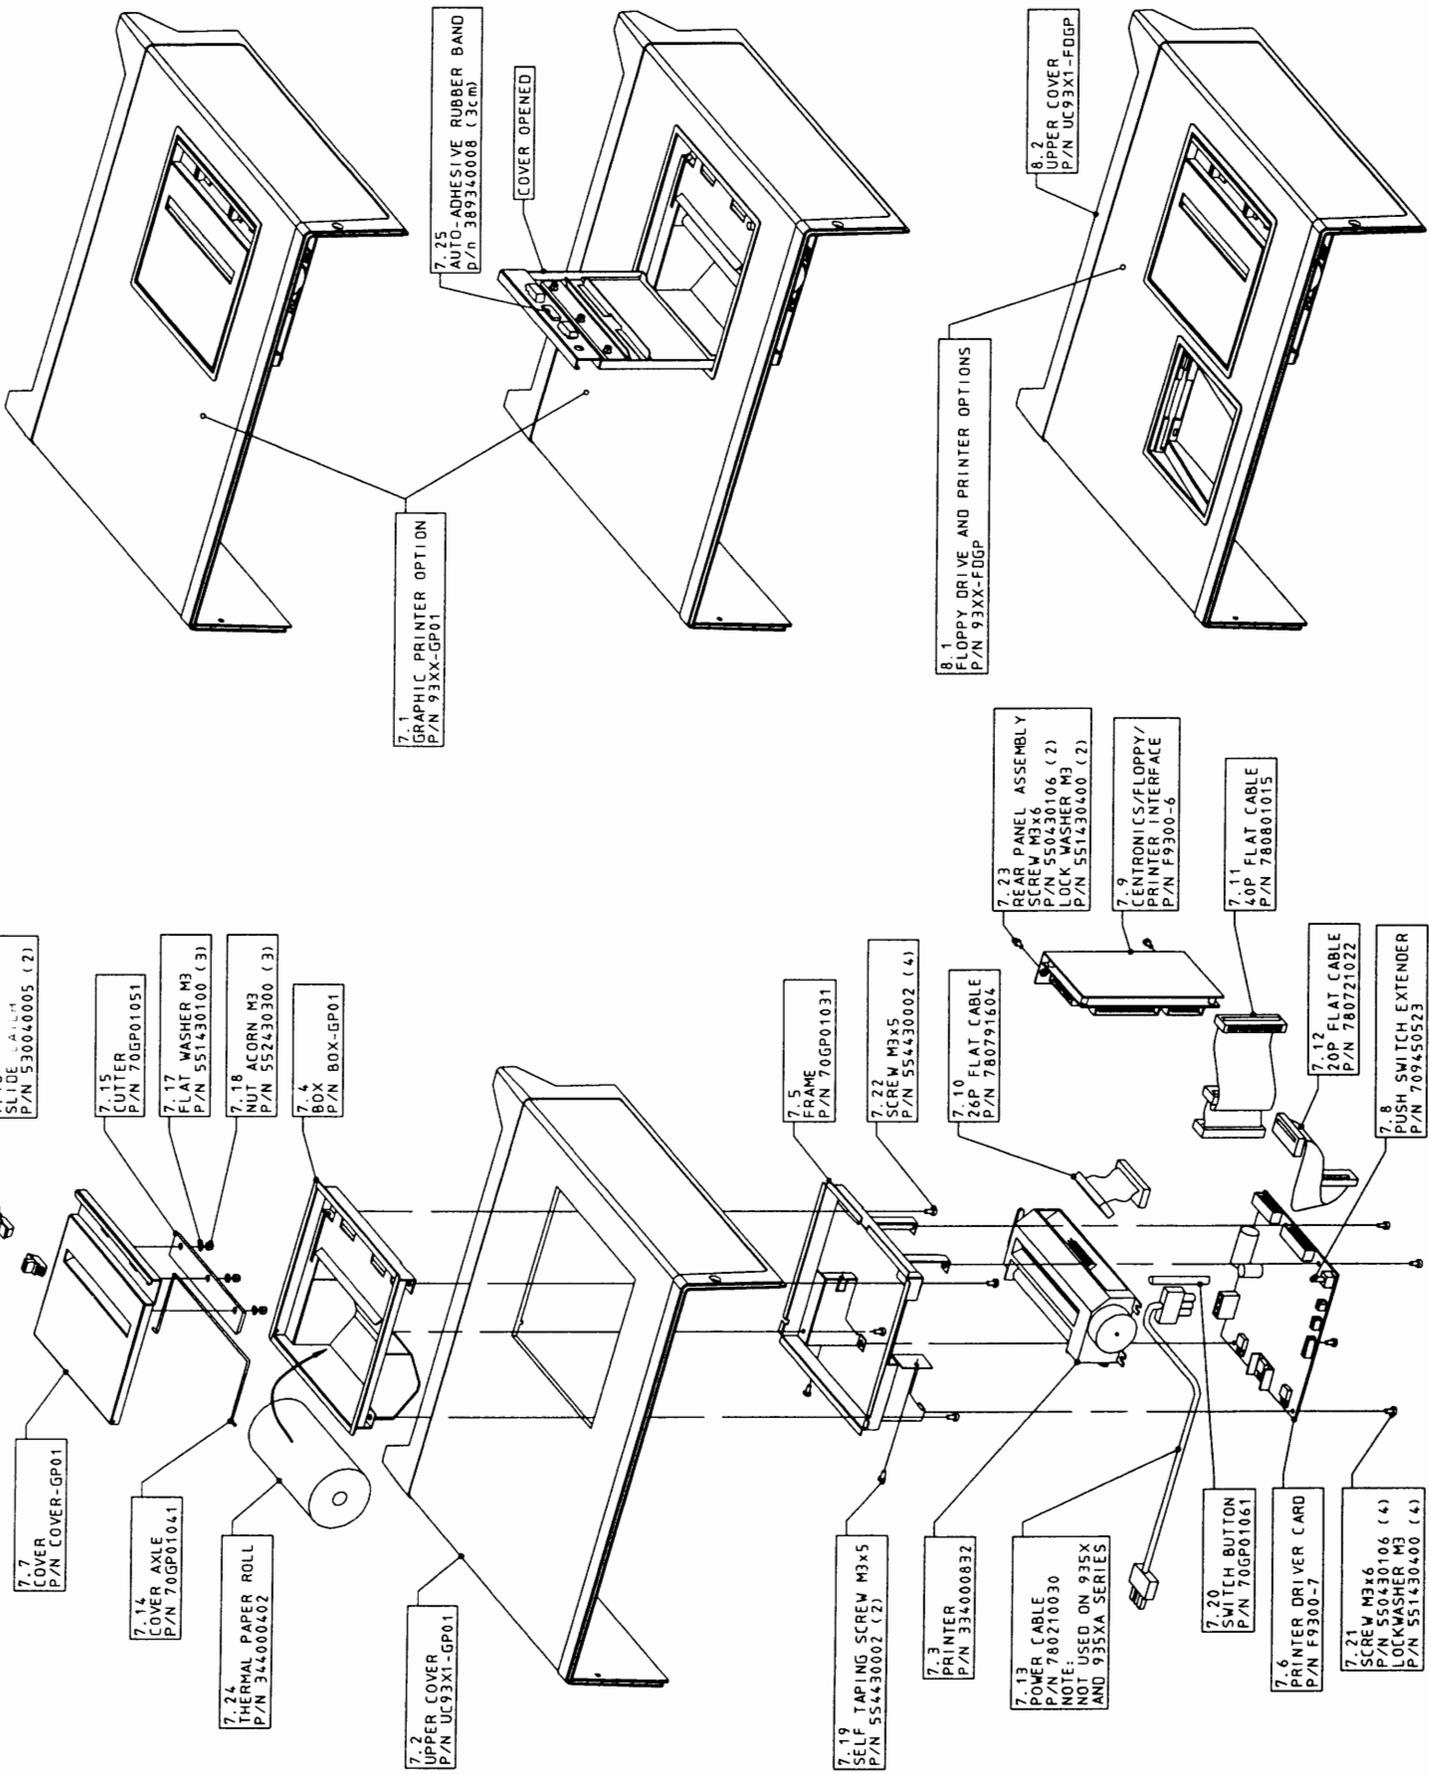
9314A/M/L Graphic Printer Assembly
